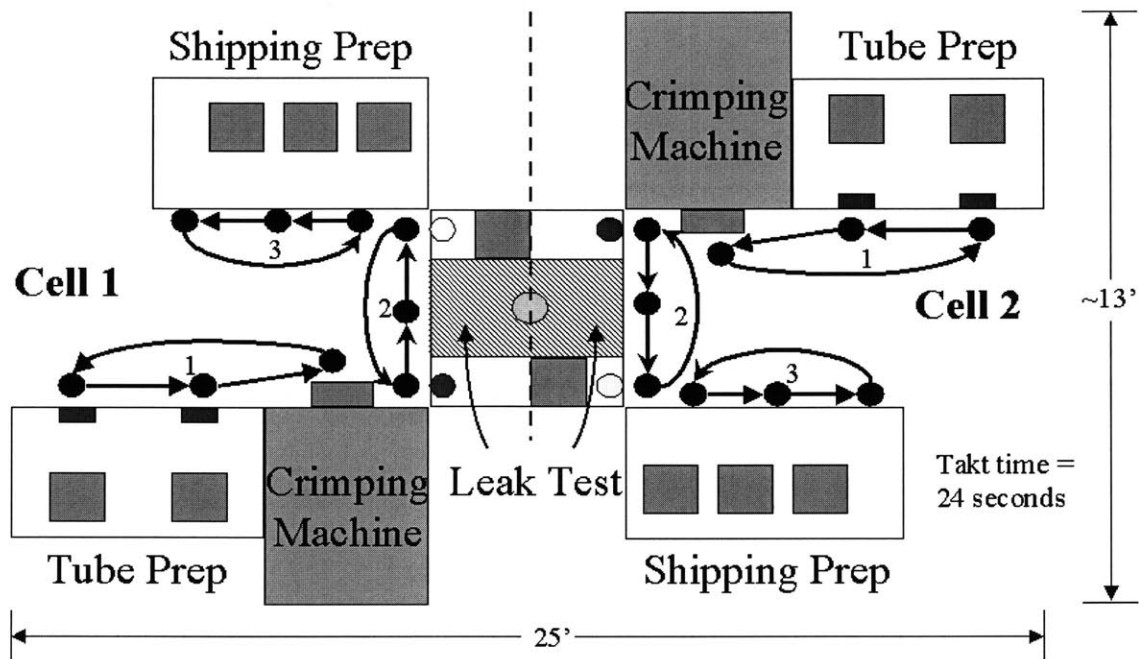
New Coclisa Two Assembly Cell Layout for Manufacturing Hoses
